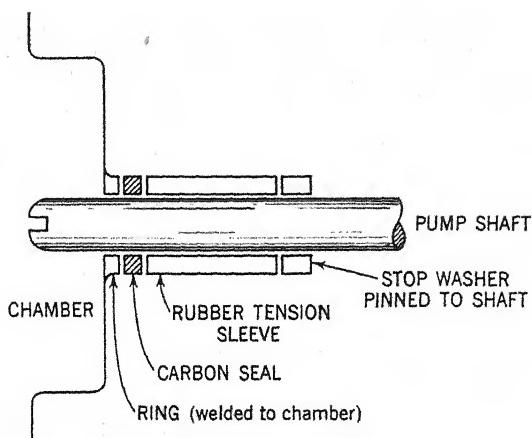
Rotary seal eliminating spring employing carbon seal. (Courtesy Cherry-Burrell Corp., Chicago, Ill.)
